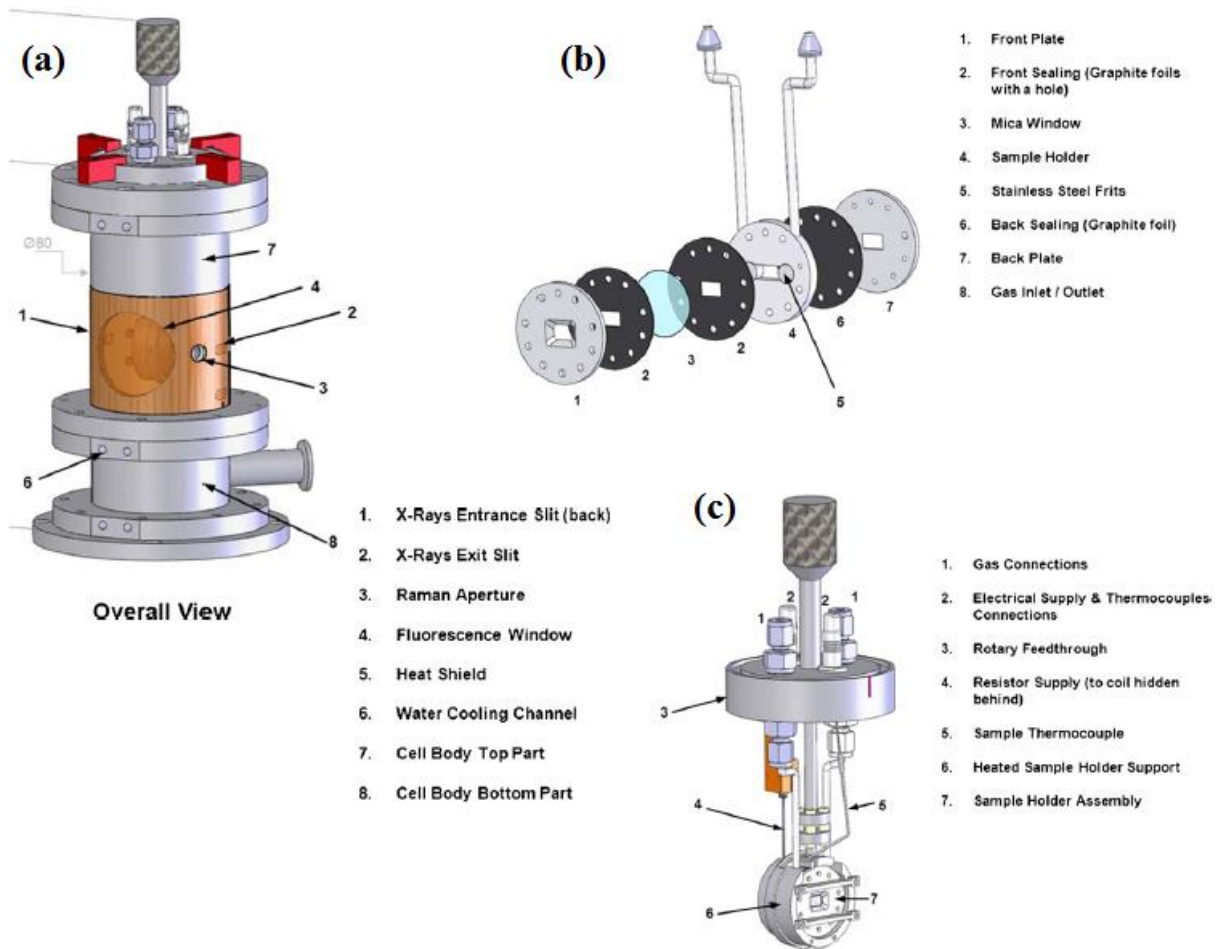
(a) Overall view of the reaction cell for QEXAFS. (b) Exploded view of the sample holder. (c) Schematic view when connected to the rotary feed through and assembled into the heated block [33].
